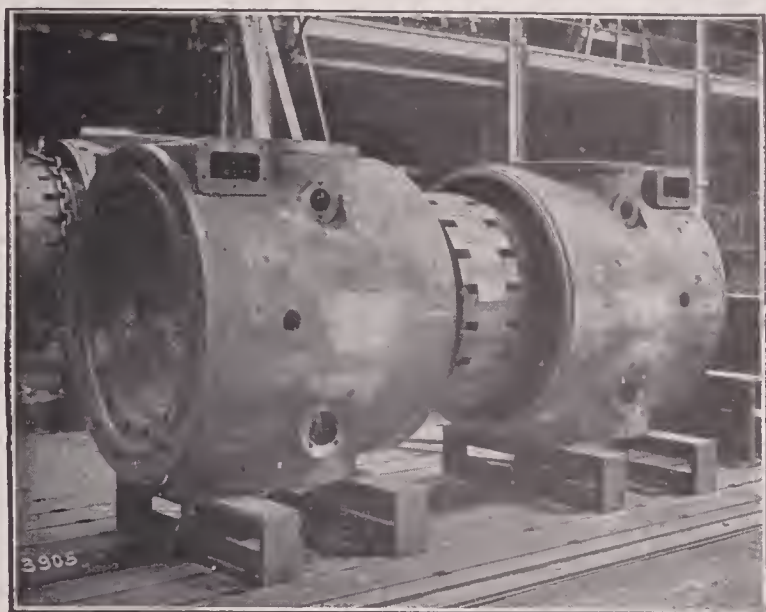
Cylinder Construction, large Westinghouse Horizontal Engine.
